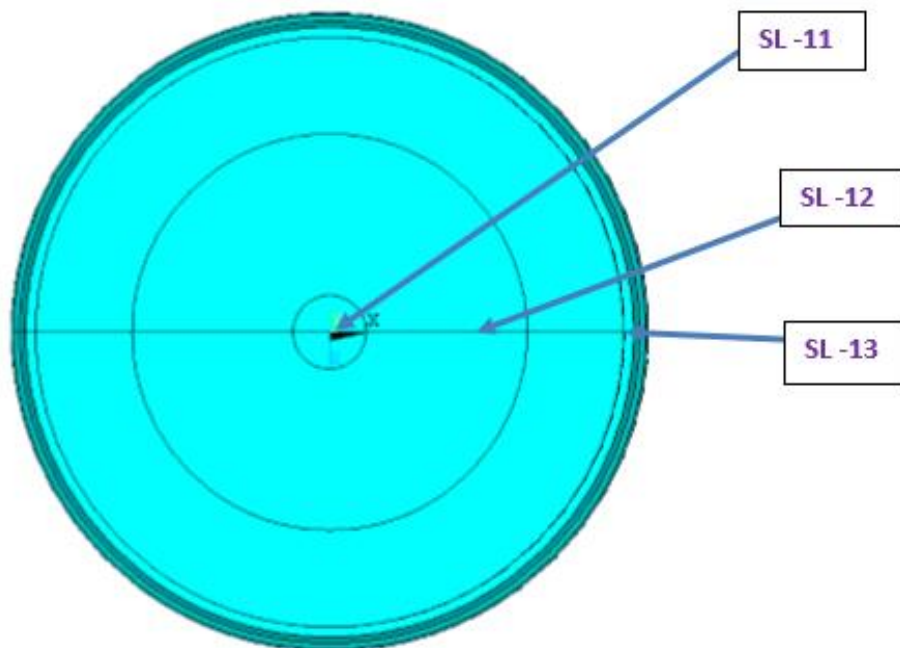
Figure IV (b). Location for strain gauges at different radial positions on the test rotor bottom end
